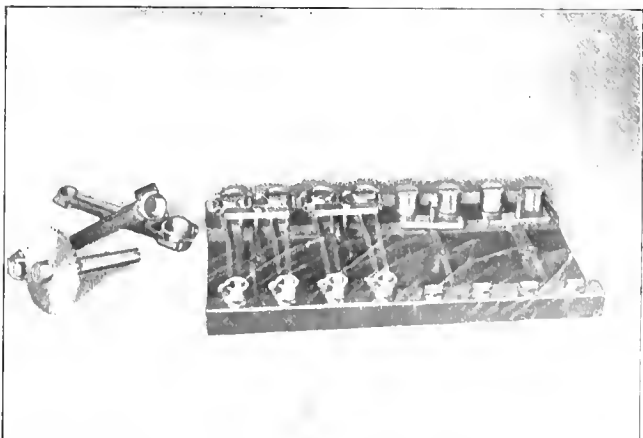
Fixture in which Connecting rod Bearings are cut off
